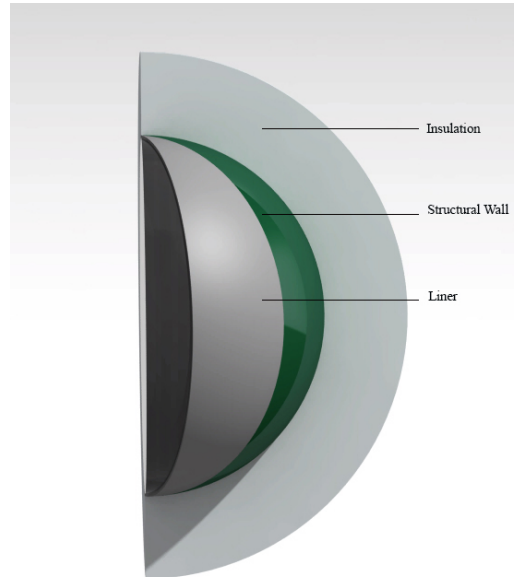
3D model of the final tank design, to scale. The labels point to the separate layers of the tank wall
